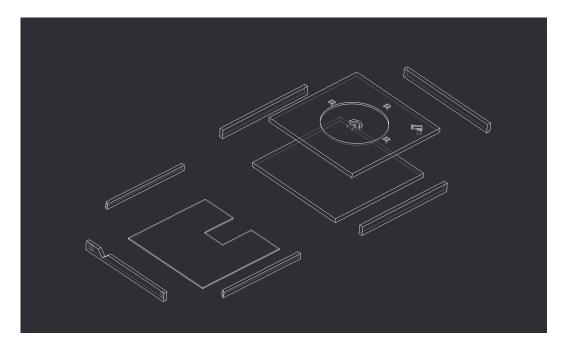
3D exploded view of new floor and drawer design. Extracted from PTC CREO Parametric 5.0.
